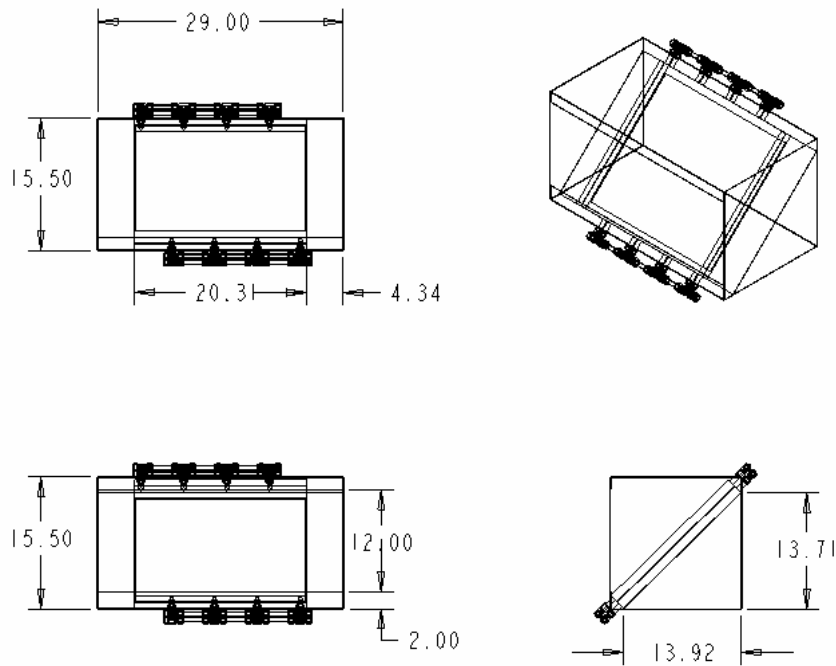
Drawing of the evaporator of the CO₂ based bread board ECU
